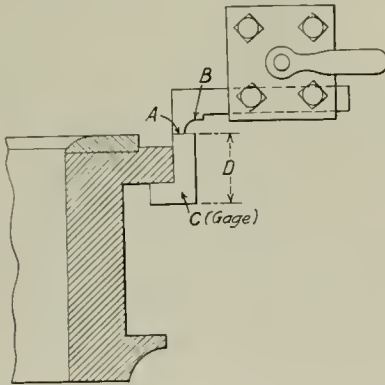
Cutting Tool for Finishing Hub Liner Showing Use of Gages for Obtaining Proper Thickness
